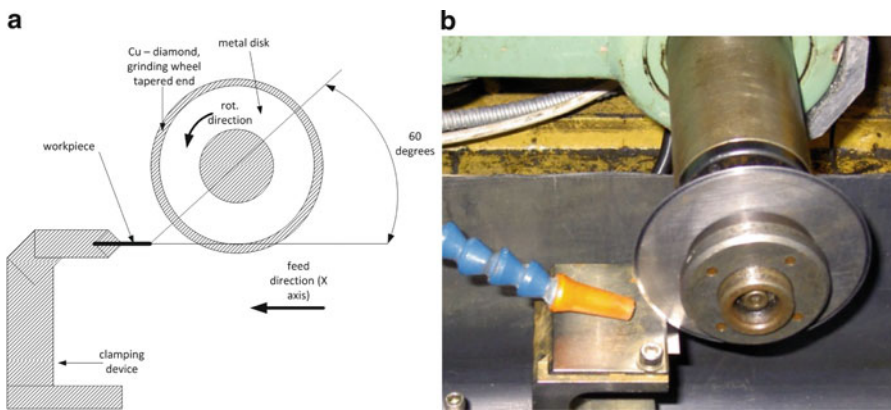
(a) The machining scheme with 60° between the workpiece and disk and (b) test stand
